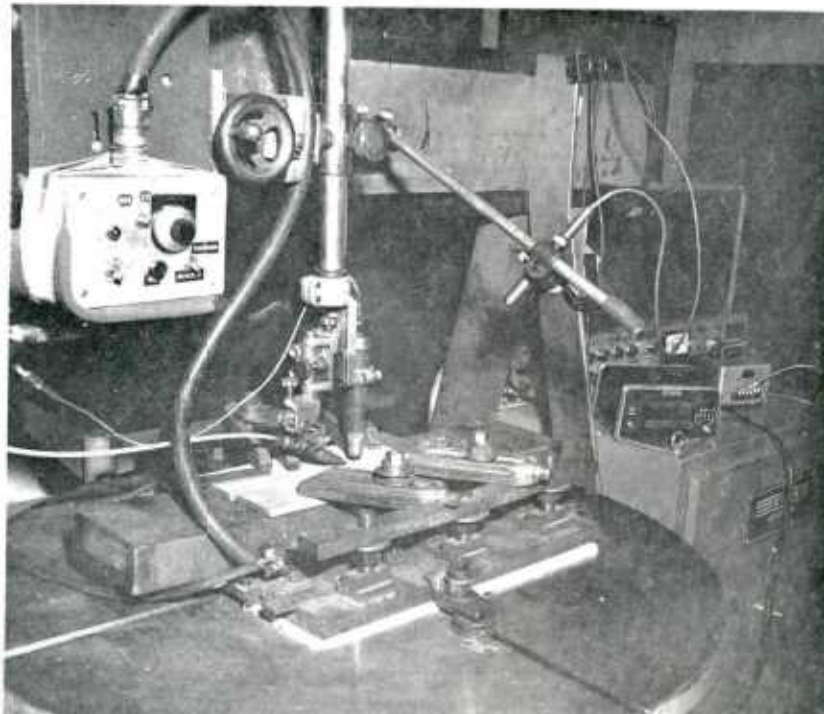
Close-up view of welding area for weld penetration control.
